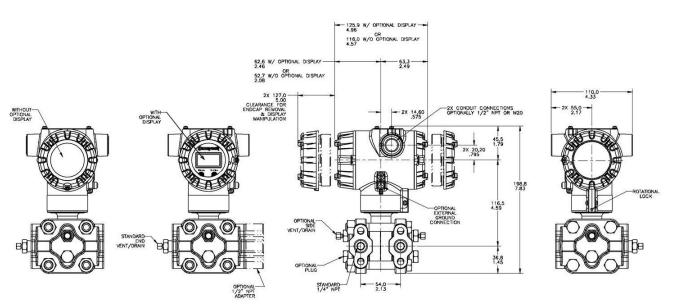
Typical mounting dimensions of STD725, STD735 & STD775 for reference only
